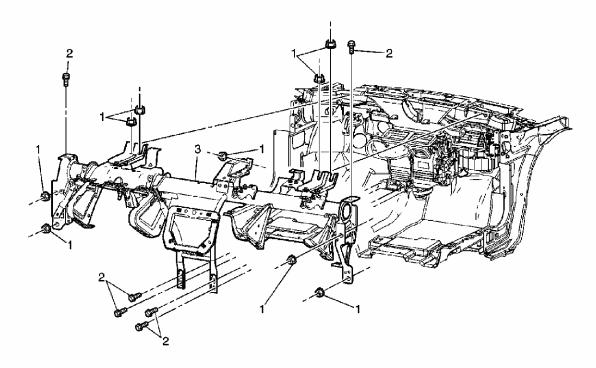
View Of Instrument Panel (I/P) Carrier Courtesy of GENERAL MOTORS CORP.
